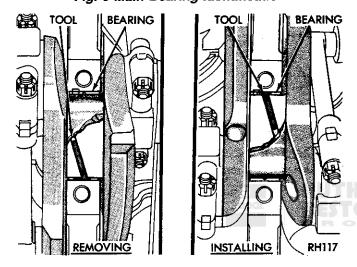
Removing/Installing Upper Main Bearing with Tool C-3059
